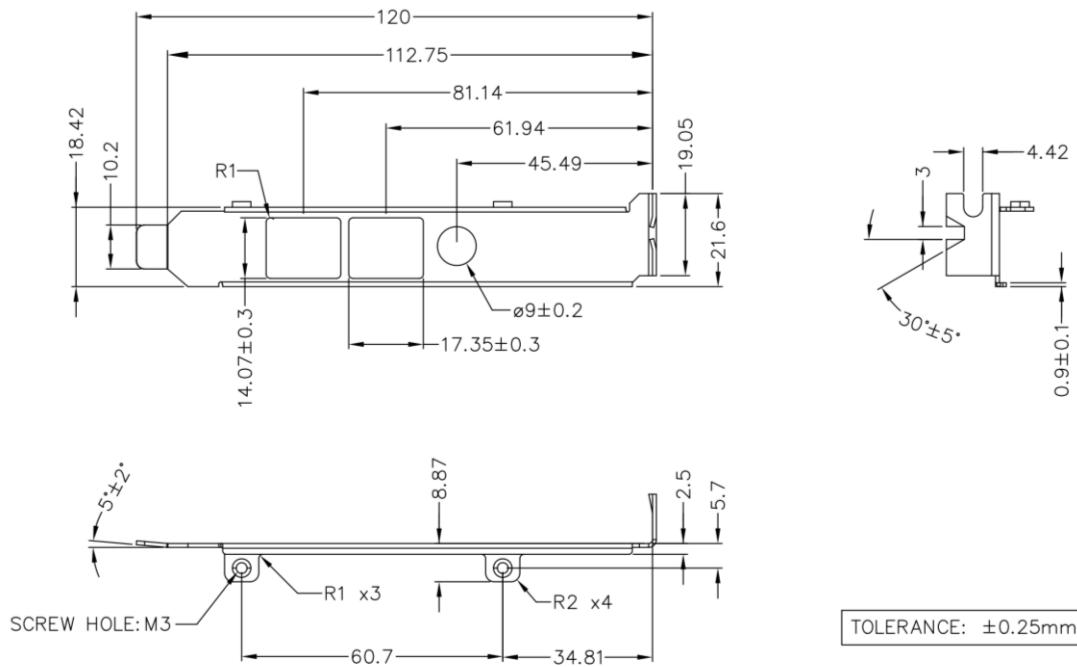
Bracket Daughter Board Drawing - 4Pin Header (EGPL-G2P1-C2/W2)
